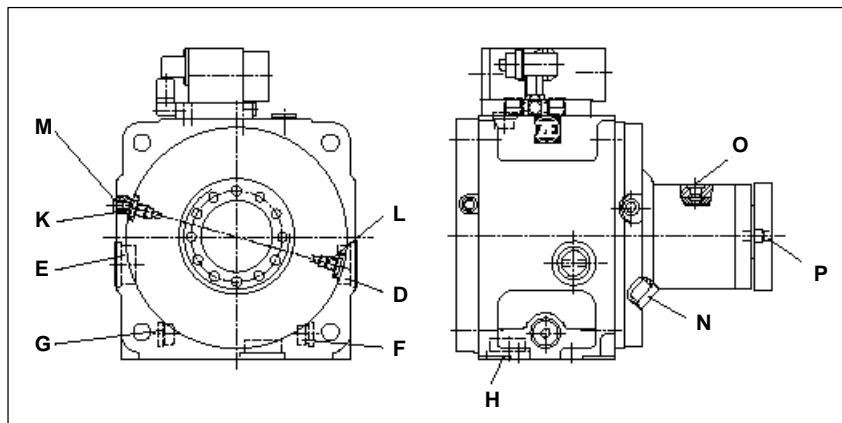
Changeover gearbox with changeover unit for frame sizes 132 and 160
